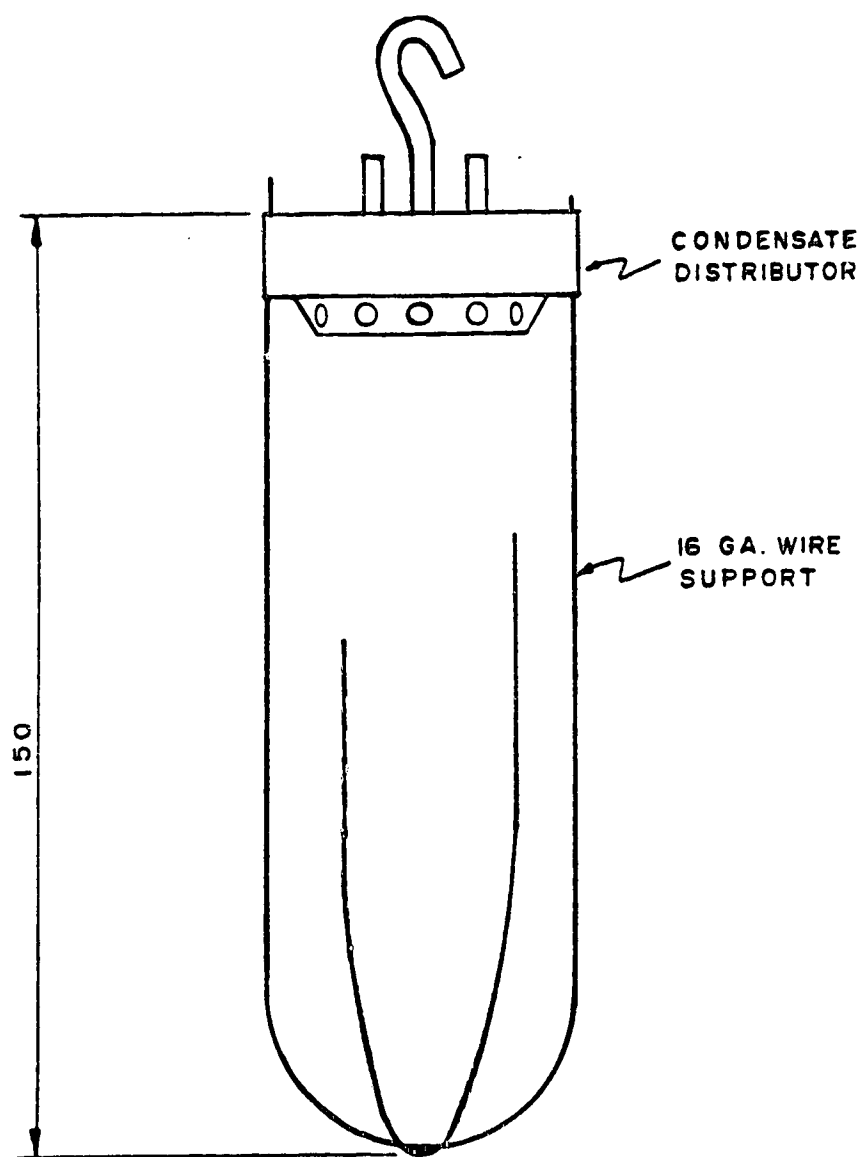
Basket support assembly. Linear dimensions have units of millimeters.
